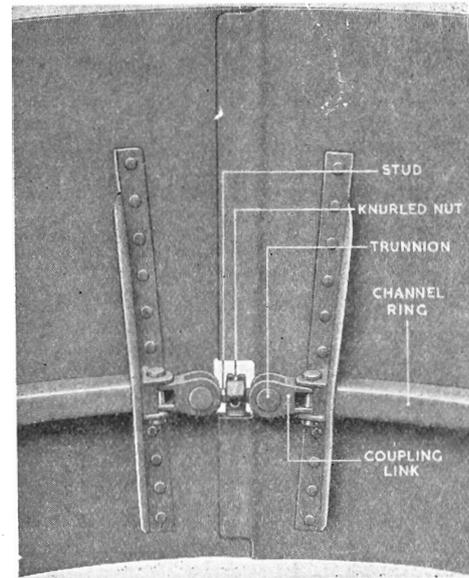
Scrap view of inside of fairing showing tumbuckle
